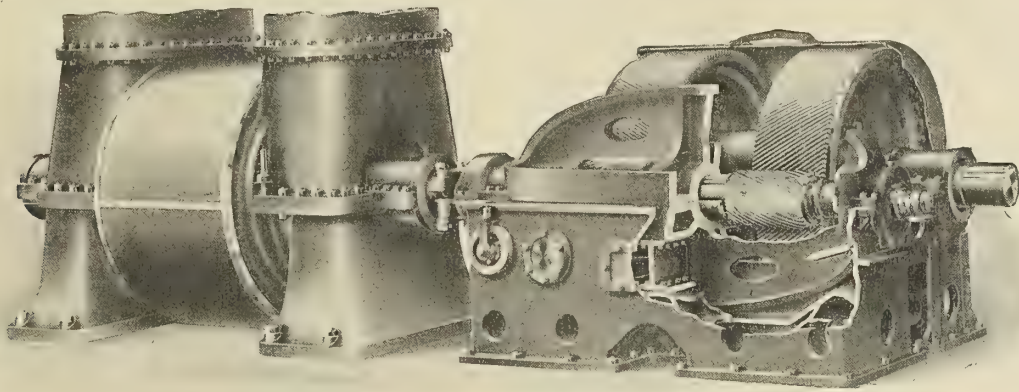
MELVILLE AND MACALPINE'S REDUCTION GEAR CONNECTED TO WESTINGHOUSE TURBINE
